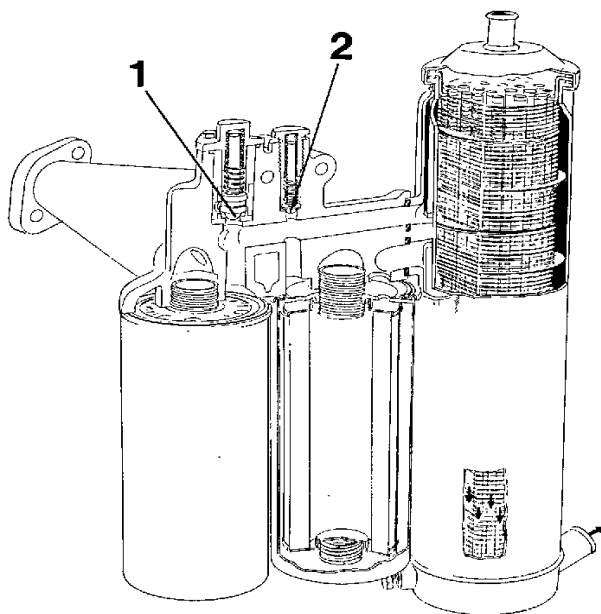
Oil filter and oil cooler, industrial engines, 120-series
